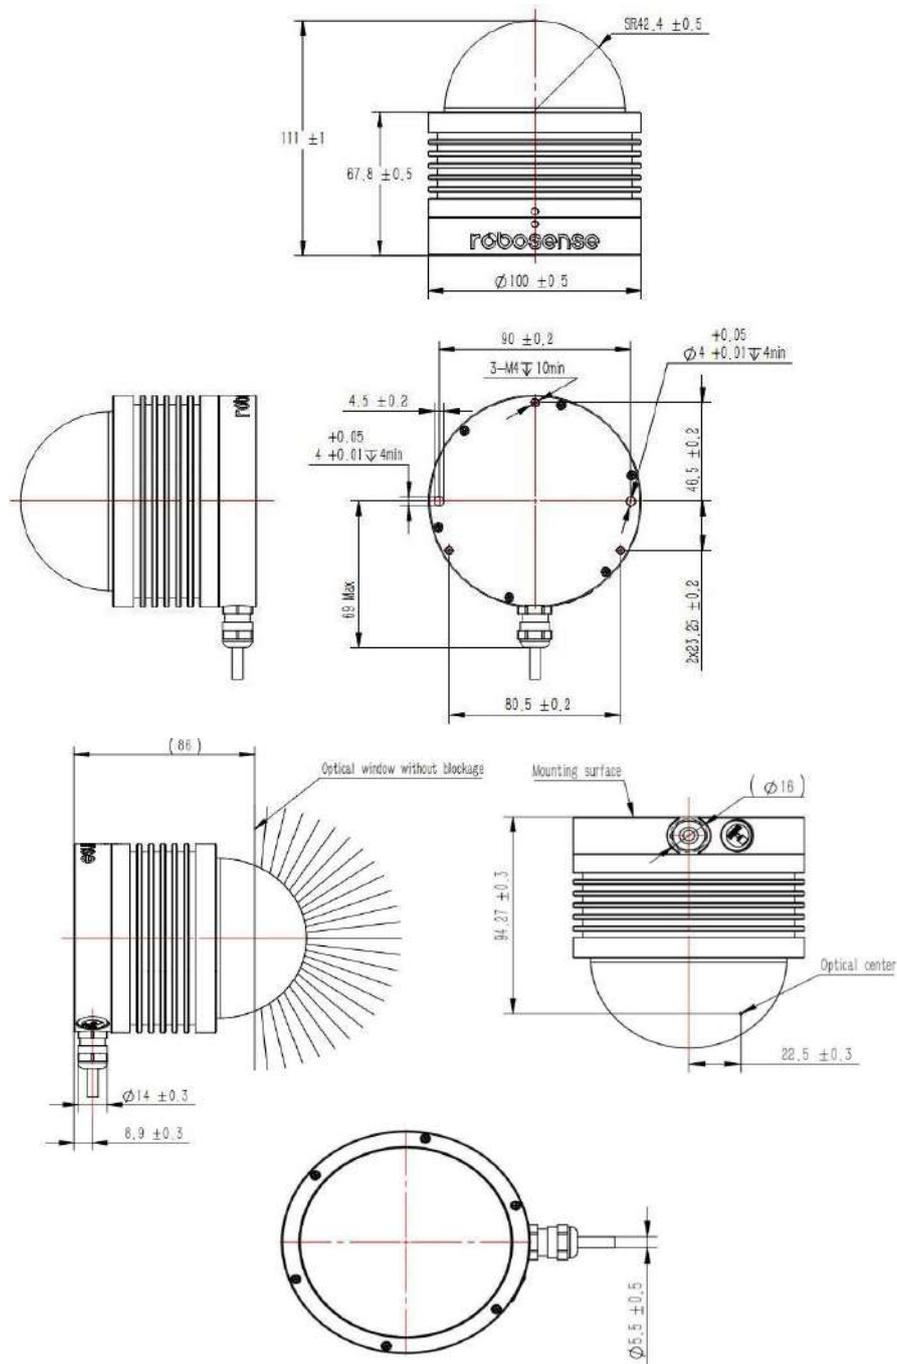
Dimension Drawing of RS-LiDAR-Bpearl.
